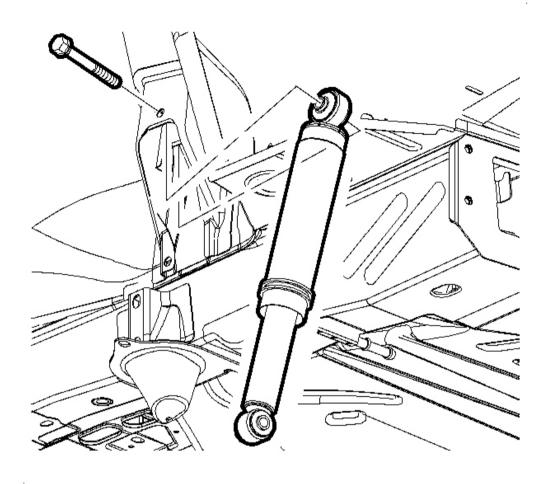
Upper Shock & Bolt Courtesy of GENERAL MOTORS CORP.
